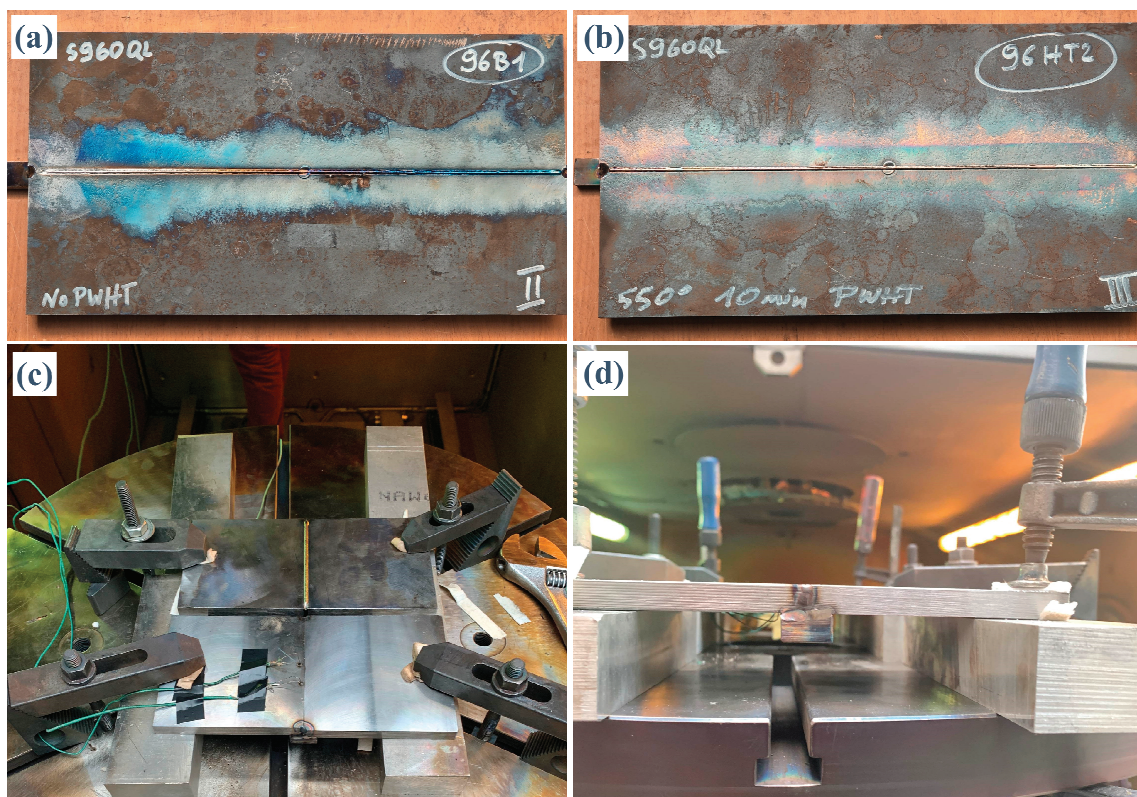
(a) Electron beam welded joint; (b) LEB-PWHT joint; (c) clamping and thermocouples for the thermal cycle on the top of the joint; (d) thermocouple arrangement on the bottom of the joint for temperature measurement during the PWHT process.
